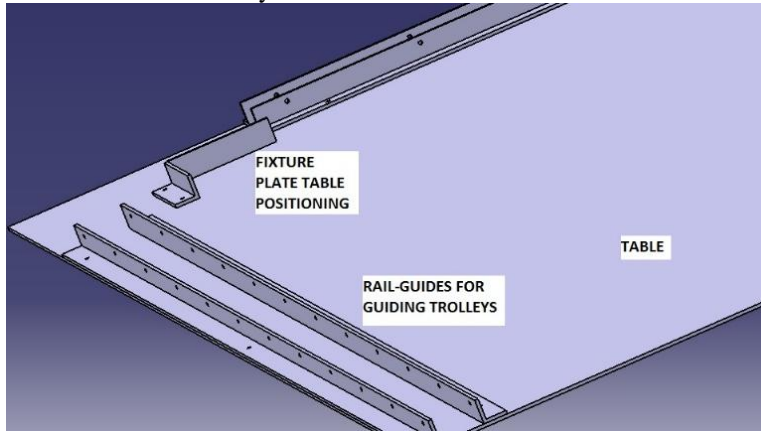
Table, Fixture Plate for placing Boxes, Guide-rails for trolleys and holes for locking sensors
